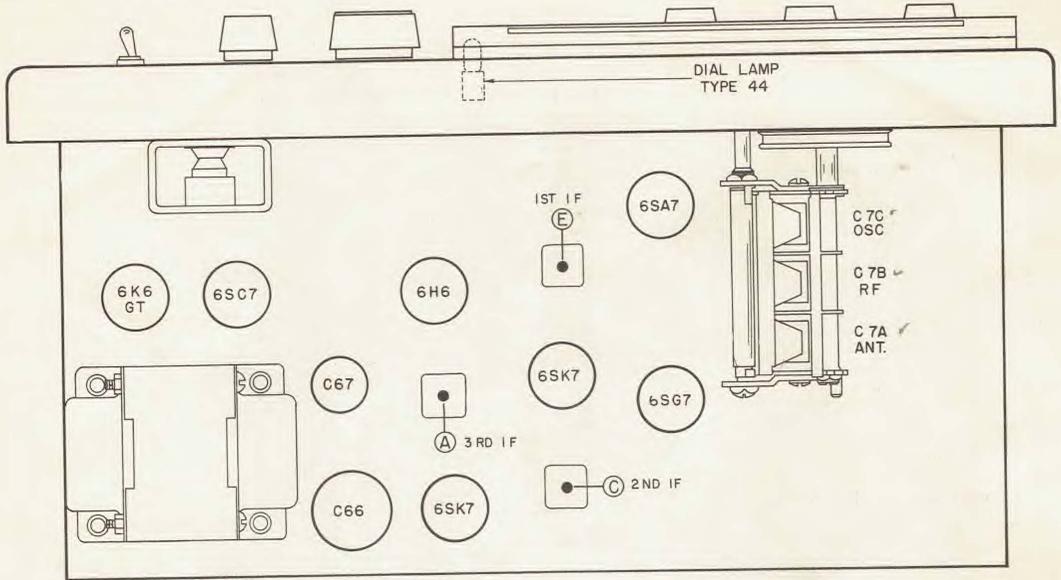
Top View of Chassis Showing Location of Alignment Adjustments, Tubes and Dial Lamp
